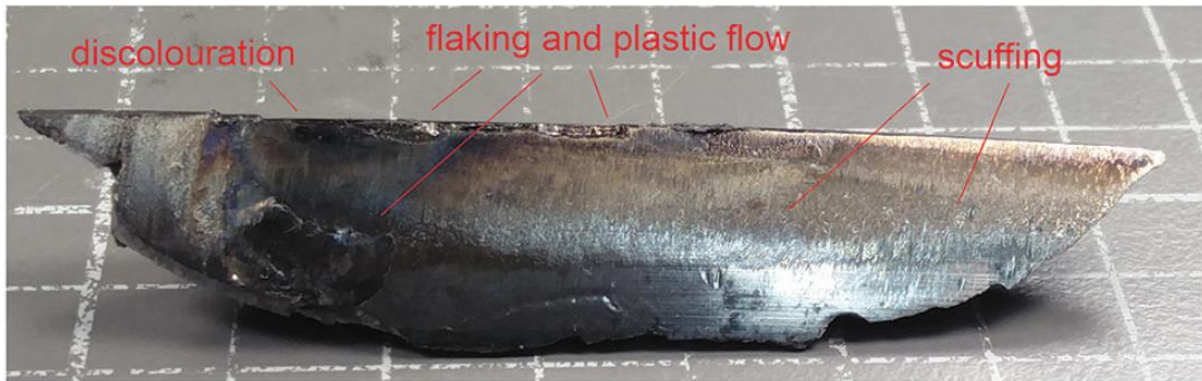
Side view of the broken tooth retrieved from the gearbox of an industrial wind turbine [91].
